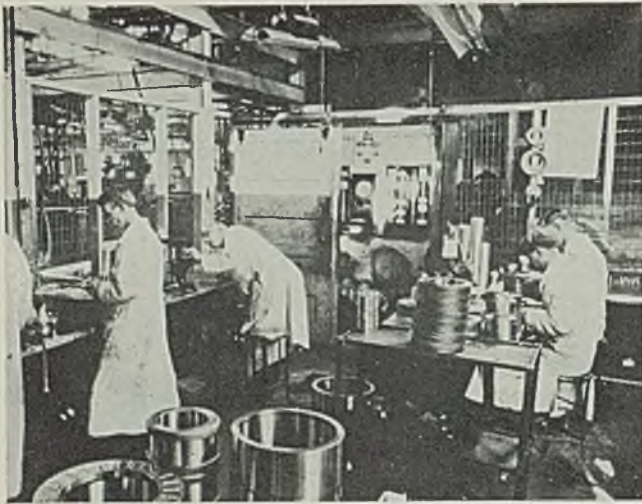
Bearing parts are inspected before assembly and assembled parts are given final inspection
